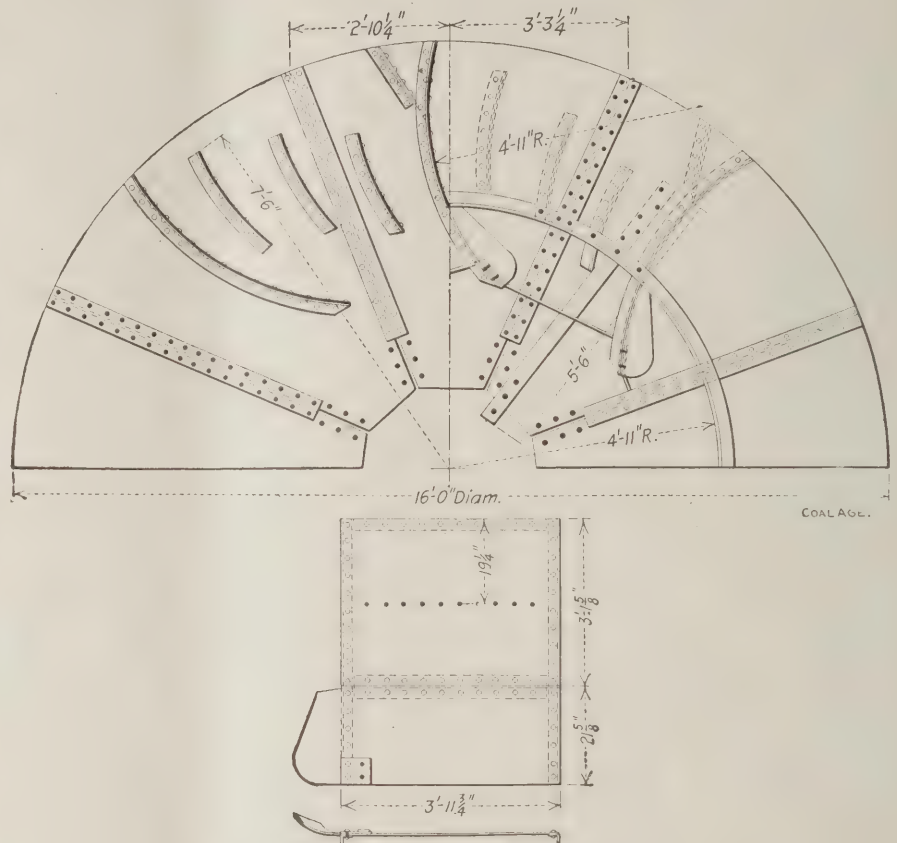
DETAILS OF CAPELL FAN WHEEL
